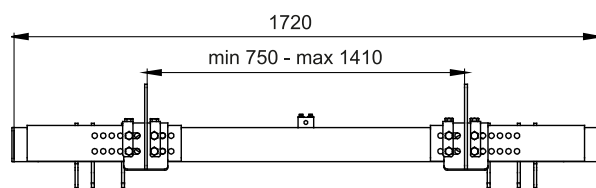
ZL-45-90, ZL-45-110, ZL-75-90, ZL-75-110
